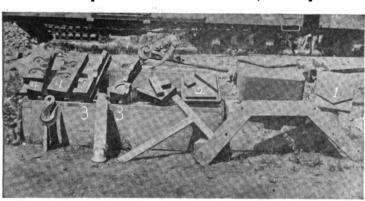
THE UPPERMOST TOOL IS THE ANVIL EYE-BENDING TOOL.
